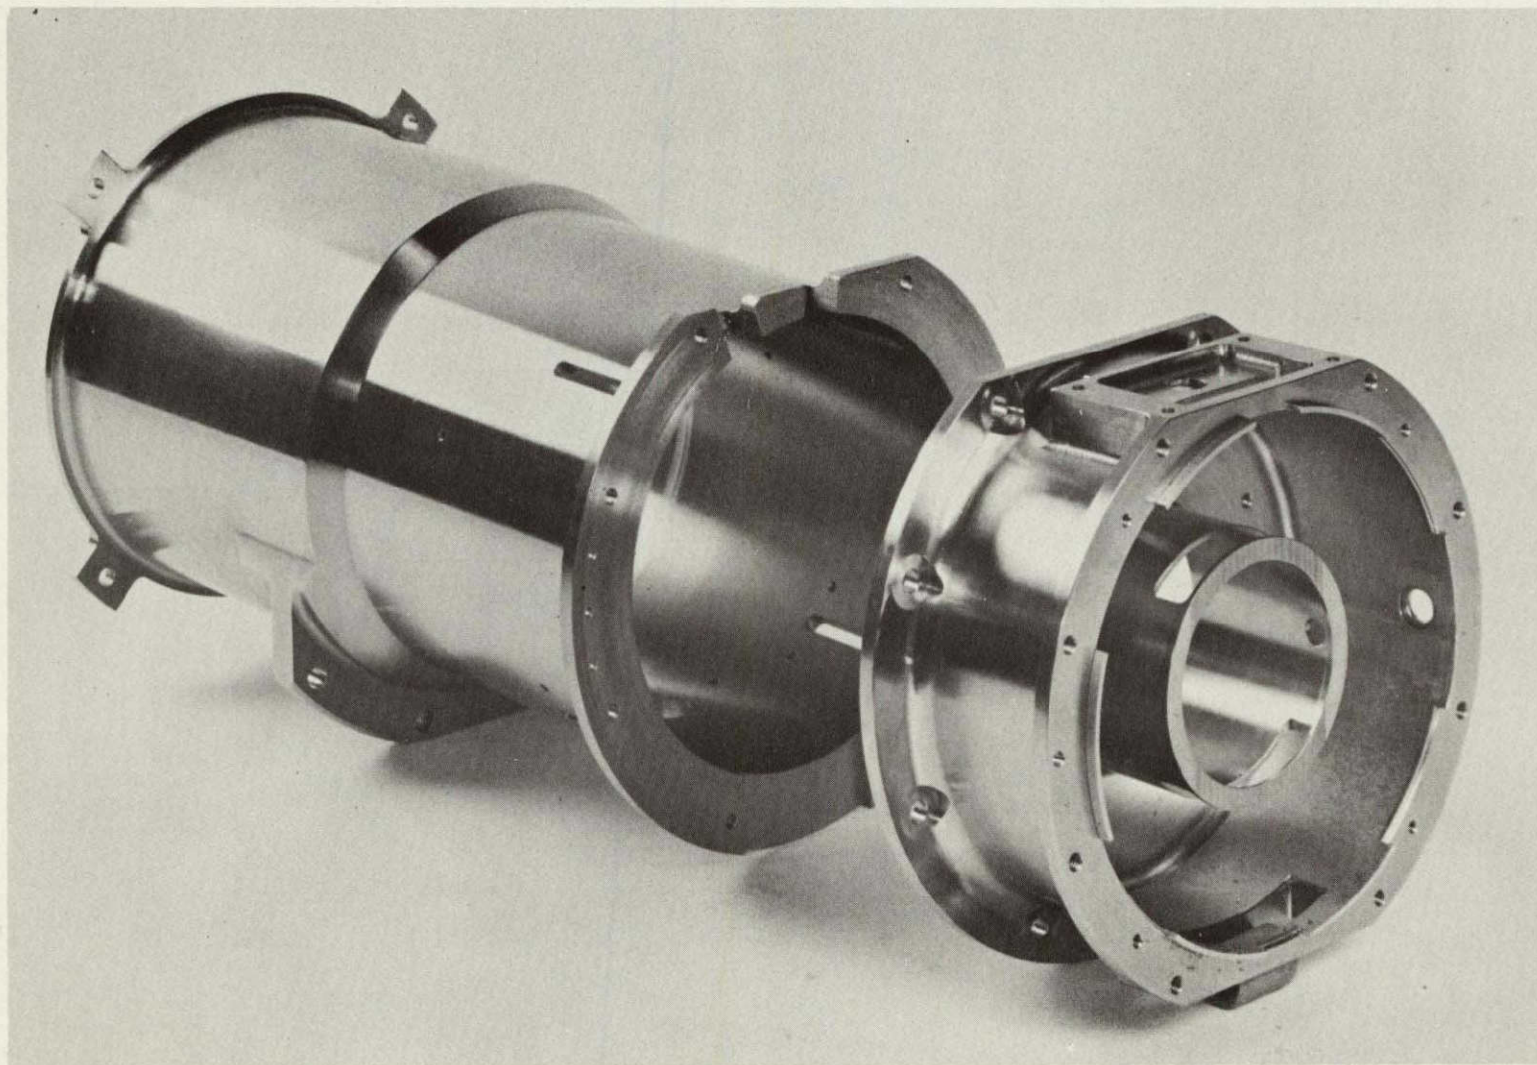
Lens Mount (shown with Front Focus Coil Housing)
